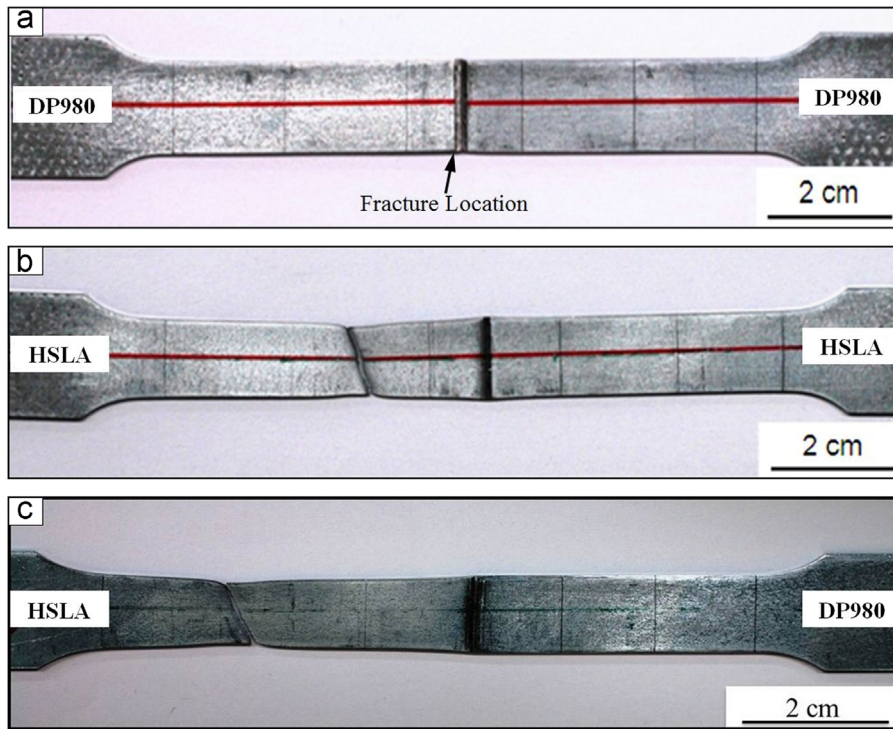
Typical tensile failure locations of fiber laser welded joints: (a) DP980, (b) HSLA, and (c) dissimilar weld; produced using 6 kW and 16 m/min [14].
